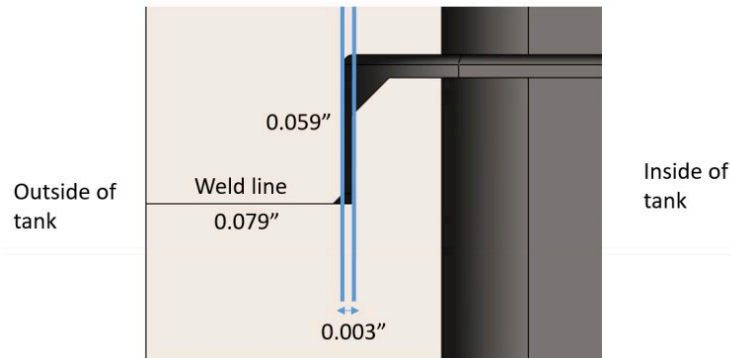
EB Weld Lap-Joint Geometry [2]
